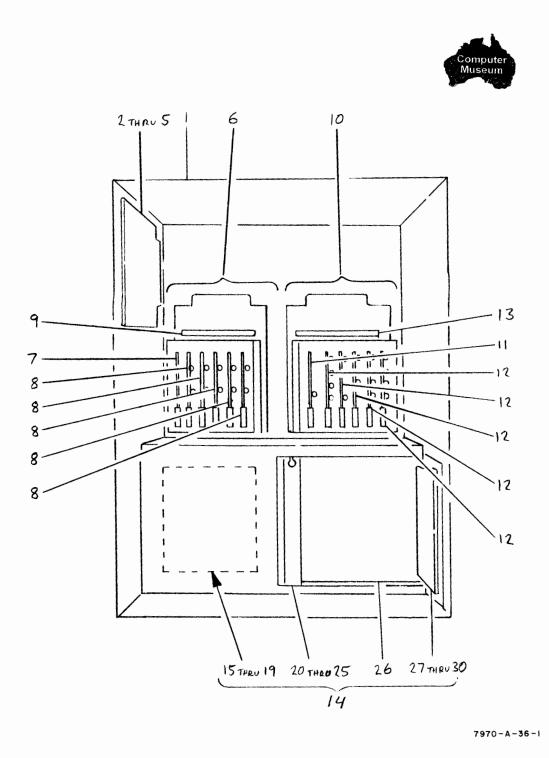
Cabinet Assembly (Sheet 1 of 2)
